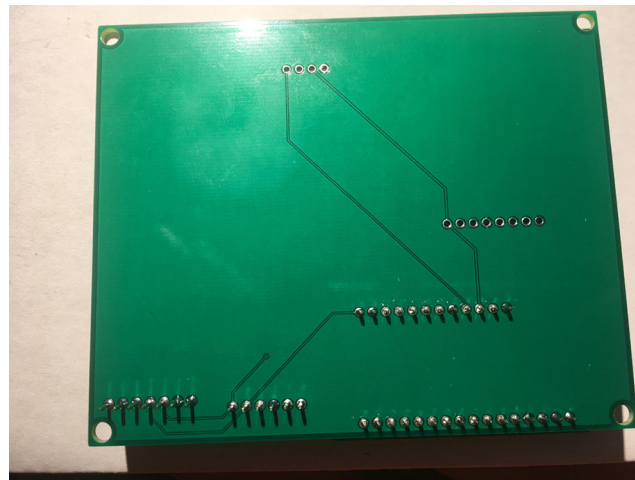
Bottom view after soldering the Temperature and Relative Humidity Sensor to the PCB.
